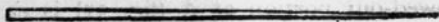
Wedge-shaped section of main portion of built-up aerofoil.
